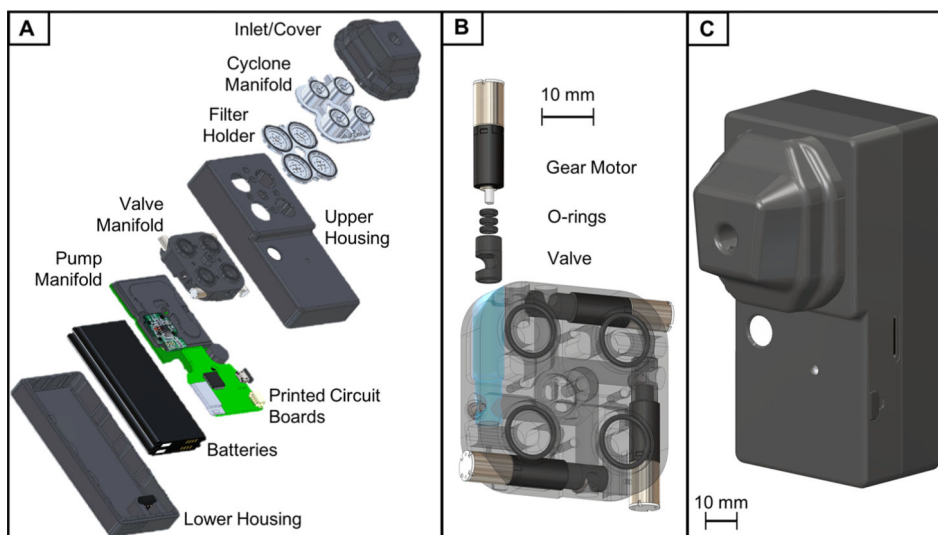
AMAS design and hardware. (A) Exploded view of all hardware components. (B) Partial exploded view of the valve manifold. (C) Fully assembled AMAS prototype.
